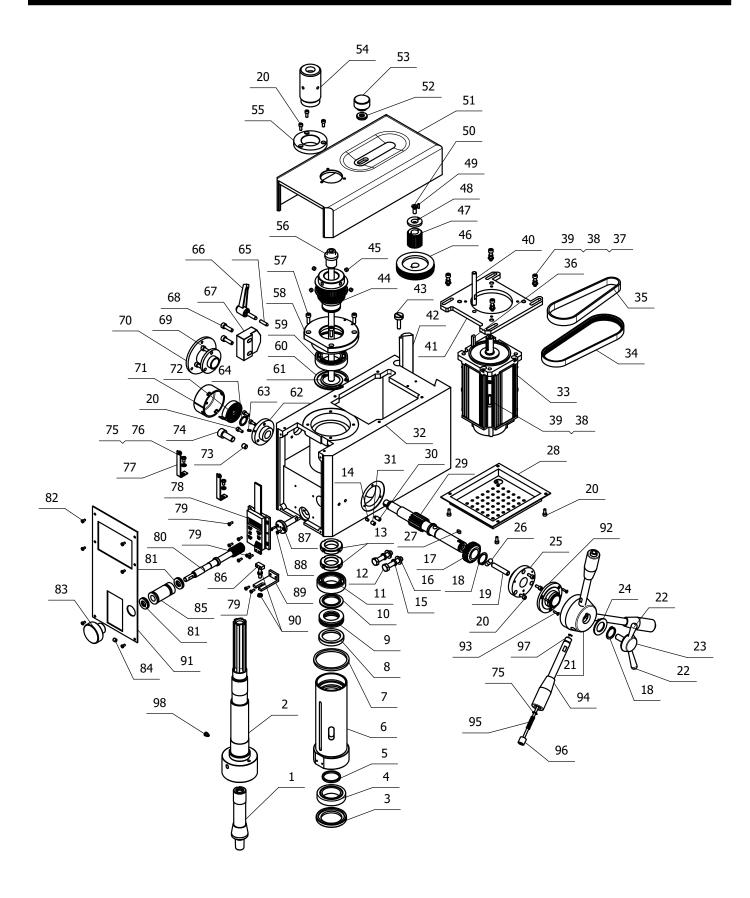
Replacement Parts Illustration for Headstock with DRO
